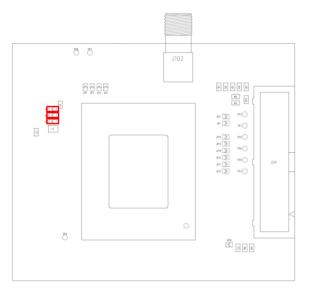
Default Soldering Configuration for Jumpers for the SL6087 Socket Board
